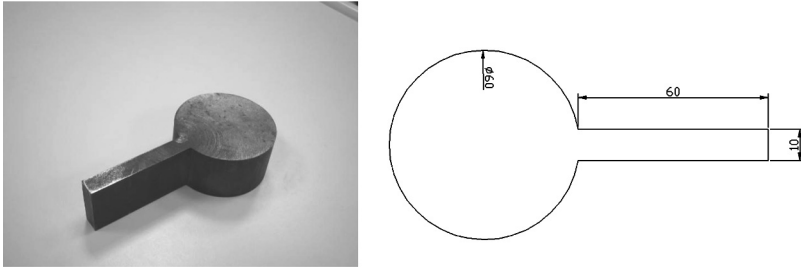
Bulk specimen processed on wire EDM machine (dim in mm).
